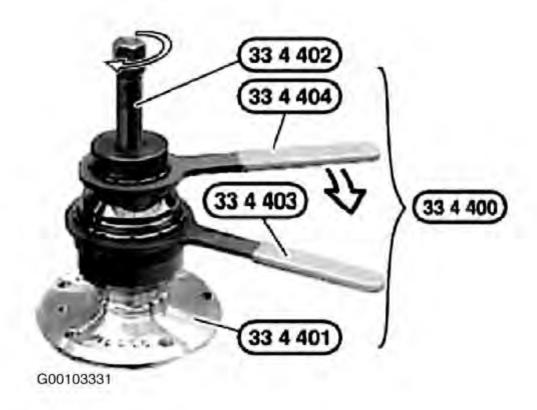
Using Special Tool 33 4 402 Courtesy of BMW OF NORTH AMERICA, INC.
